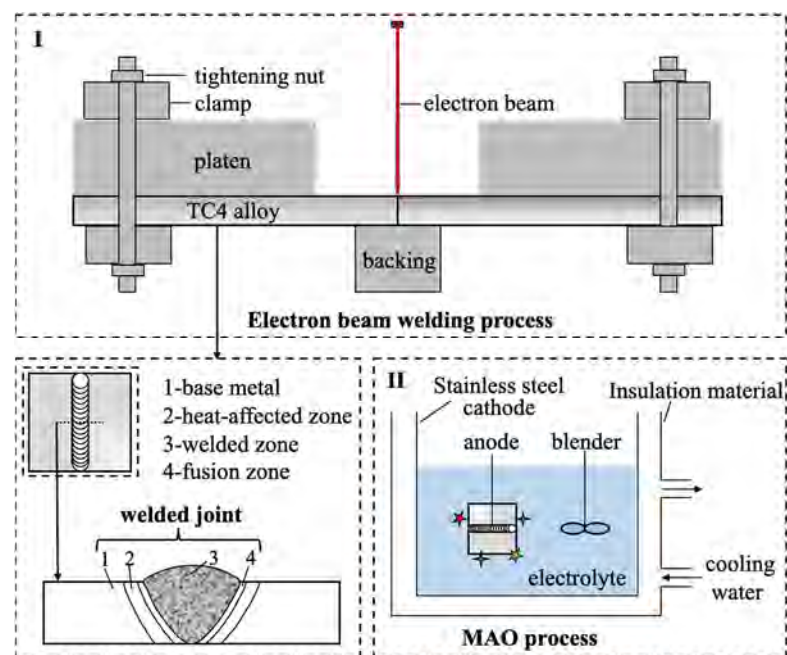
Schematic drawing of electron beam welding process (I) and subsequent MAO process (II).
